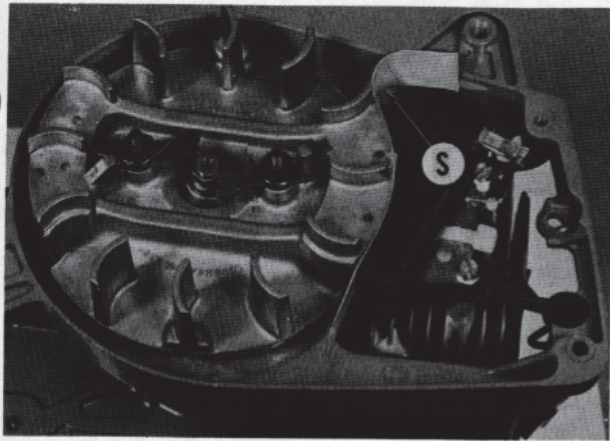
Insert shim stock (S) as indicated in text to set air gap.
